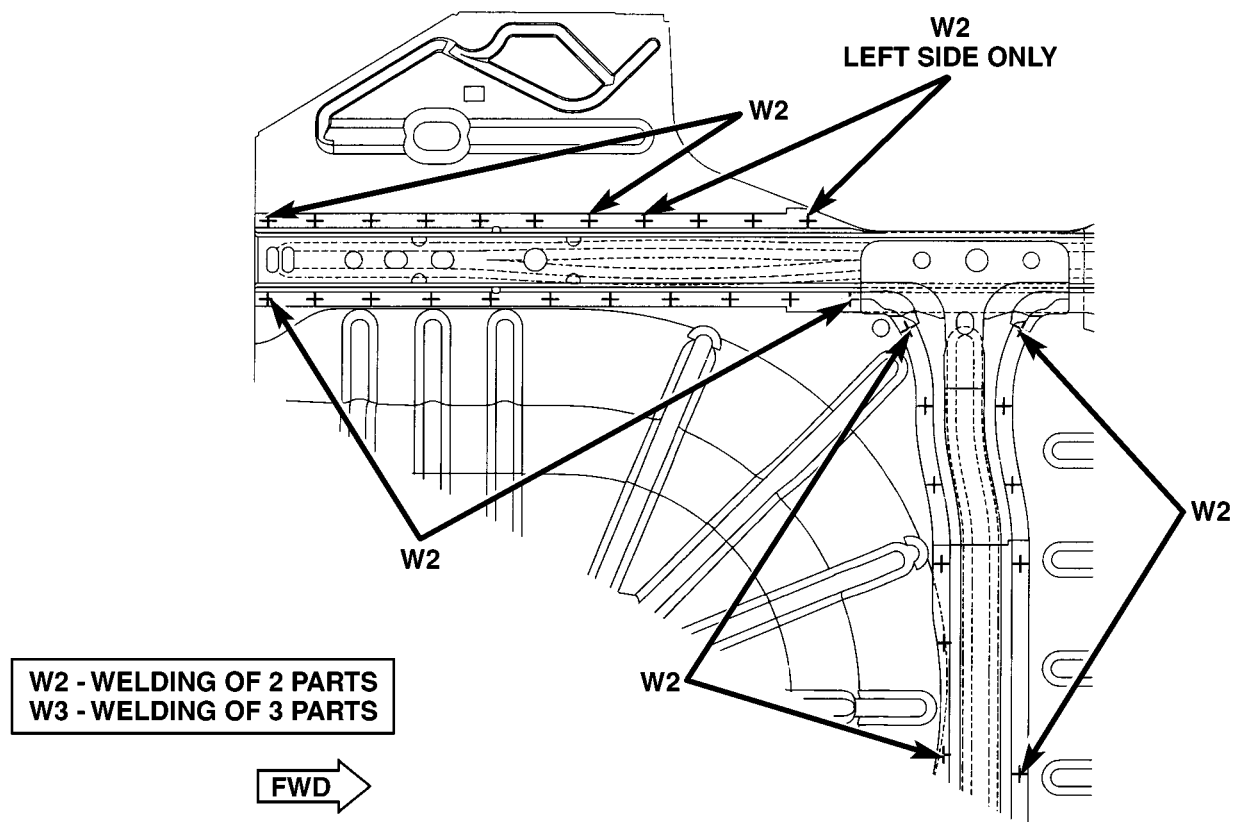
REAR SIDE RAIL & REAR SUSPENSION CROSSMEMBER TO REAR FLOOR PAN
